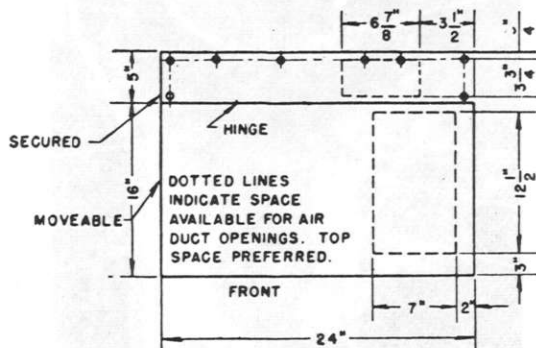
Top view of SF/SF-1 indicator cover.
